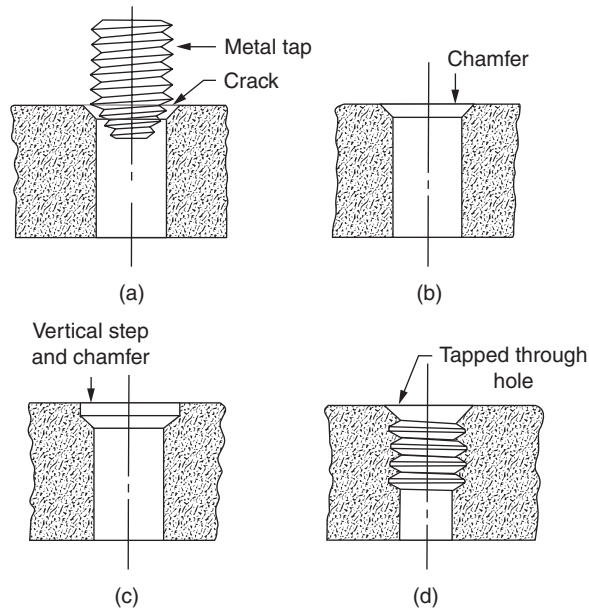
Female thread. If the mating part is to seat properly with its companion plastic part, an annular groove should be provided.
